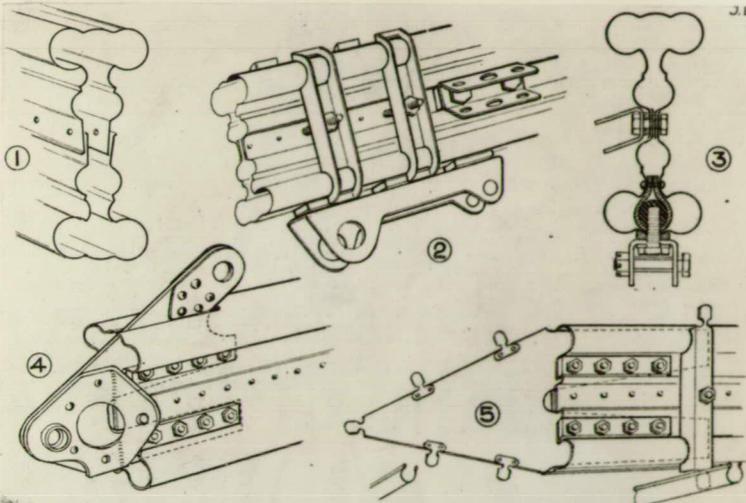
Details of wing spar construction. A section of a main spar is shown in 1, while 2 shows how drag and interplane struts are attached. The section in 3 shows method of reinforcing spar for attachment of strut fittings. A spar end with flat plate fitting is shown in 4, while 5 illustrates the method of forming the wing tip.
